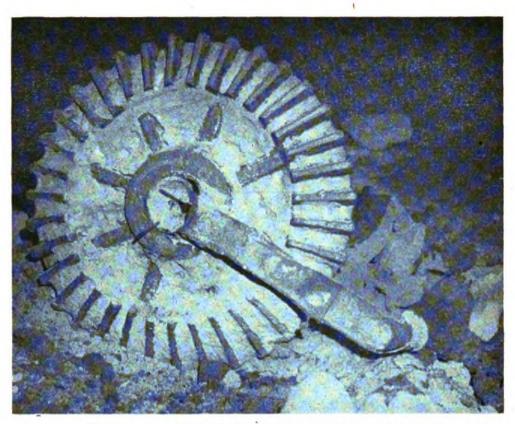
Pinion gear as it was shaken out of mold. Note sand to be cleaned off.
